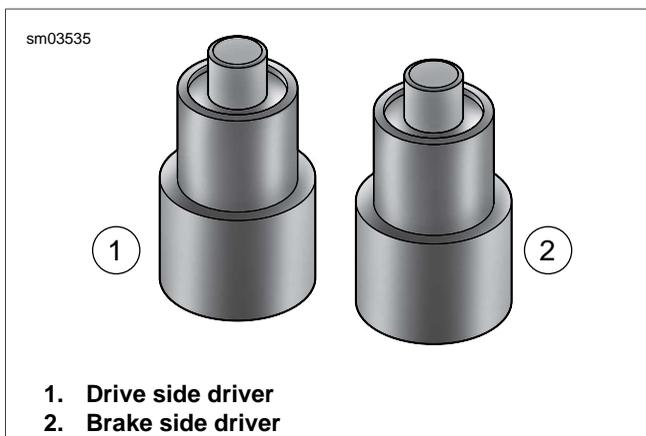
Rear Swingarm Bearing Installer (HD-45327)
